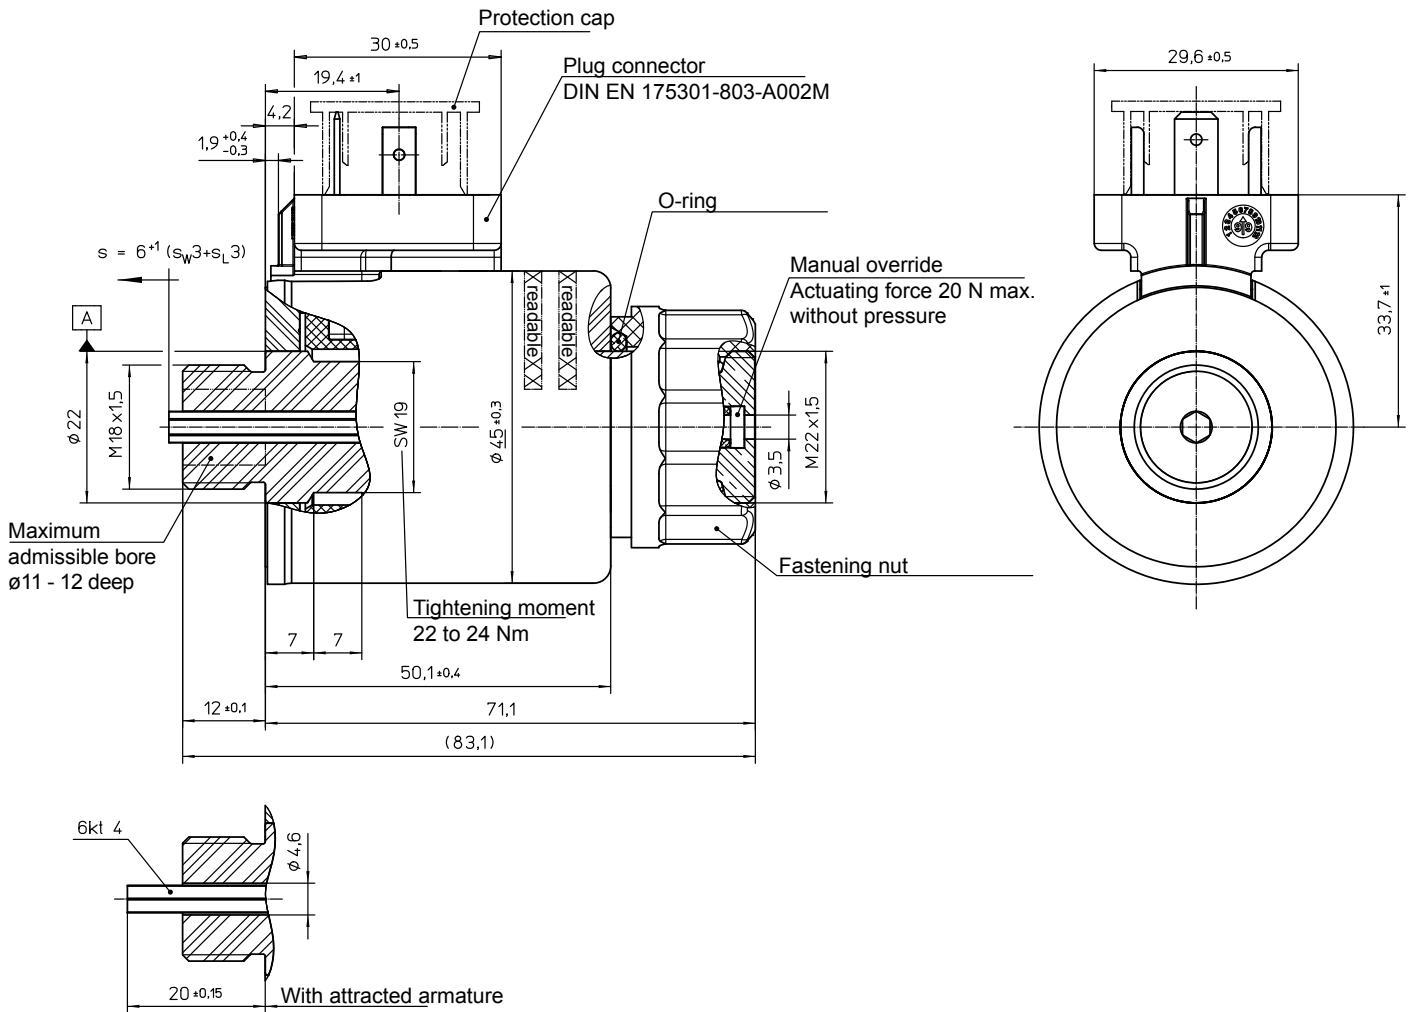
Dimensional drawing to Type G RC Y 045 N54 A01
